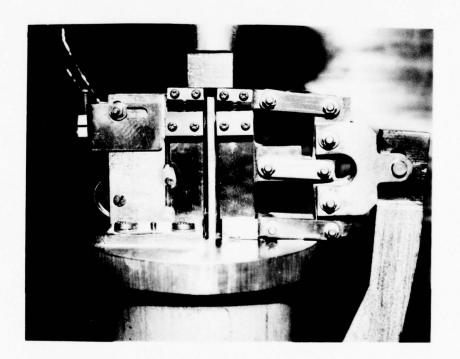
Close-up view of compression fixture showing method of clamping specimen.
